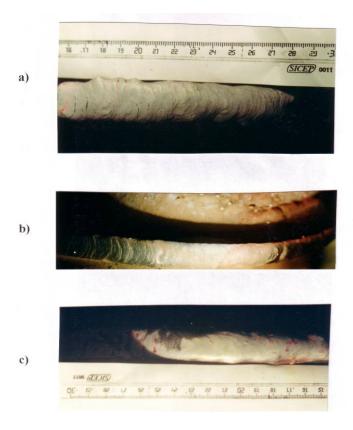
weld beads free from cracks as detected by dye penetrant test
